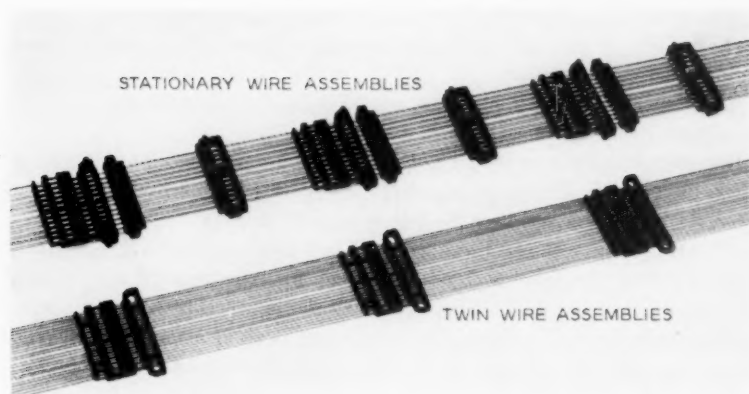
Molded stationary and twin wire assemblies, before cutting to length.
